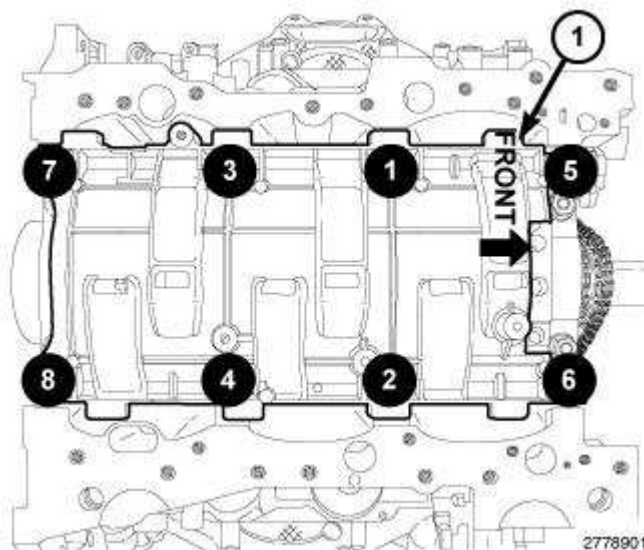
Windage Tray With Main Bearing Cap Bolts Installation Sequence
